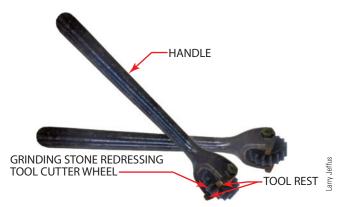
Use a grinding stone redressing tool as needed to keep the stone in balance.
